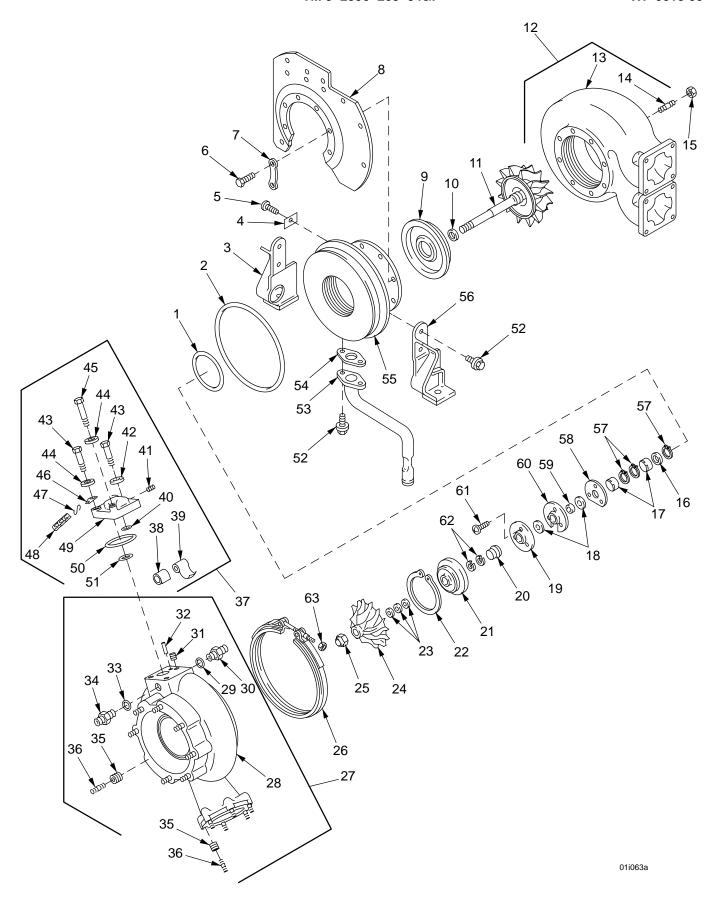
Turbosupercharger Assembly 655595-3 and 655595-4.
